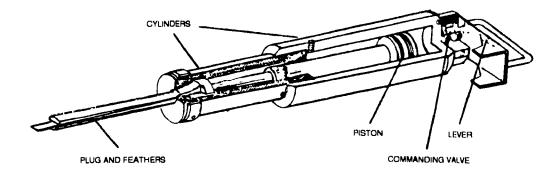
CUTAWAY VIEW OF A TYPICAL HYDRAULIC SPLITTER\
